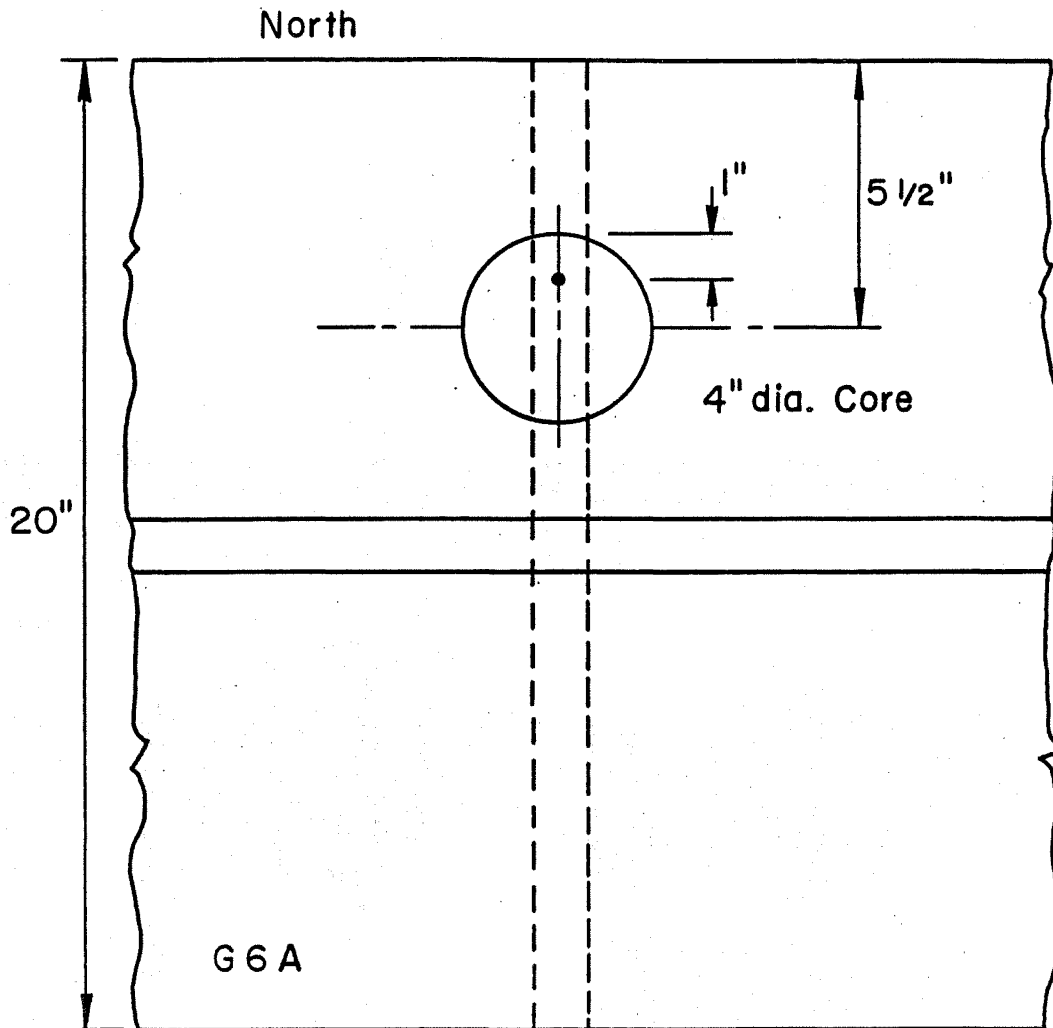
Location of Defects in Electroslog Weldment G6A by Nondestructive Testing
